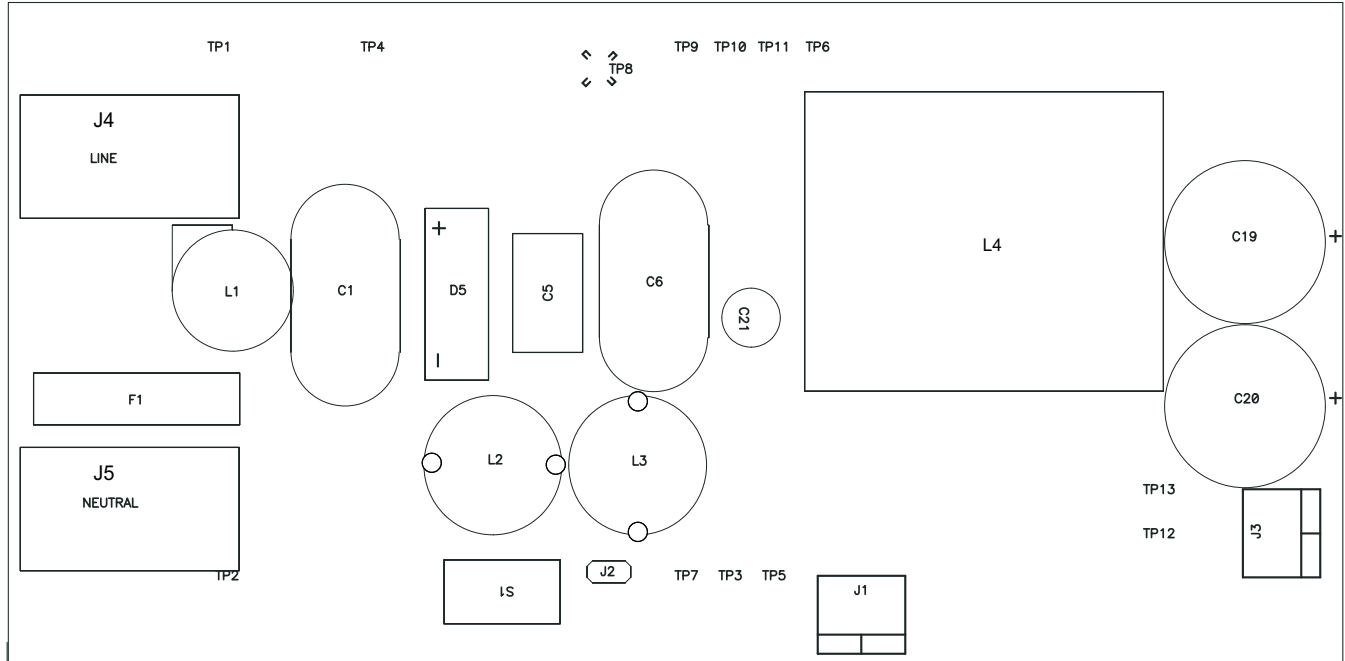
UCC29910AEVM-730 Top Layer Assembly Drawing (top view)
